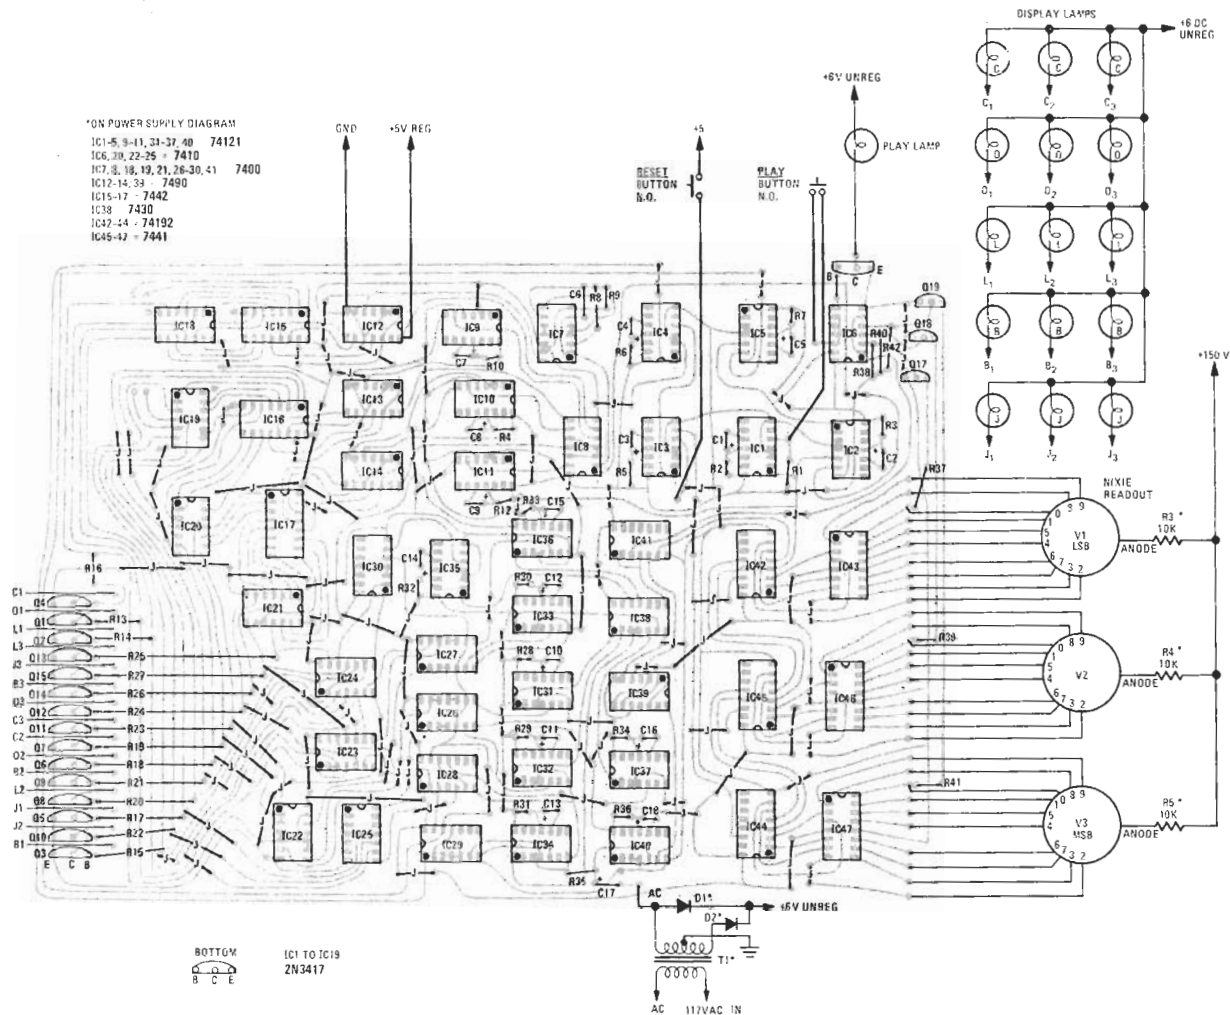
THE BOARD LAYOUT, showing jumpers and leads to components mounted on panel.
